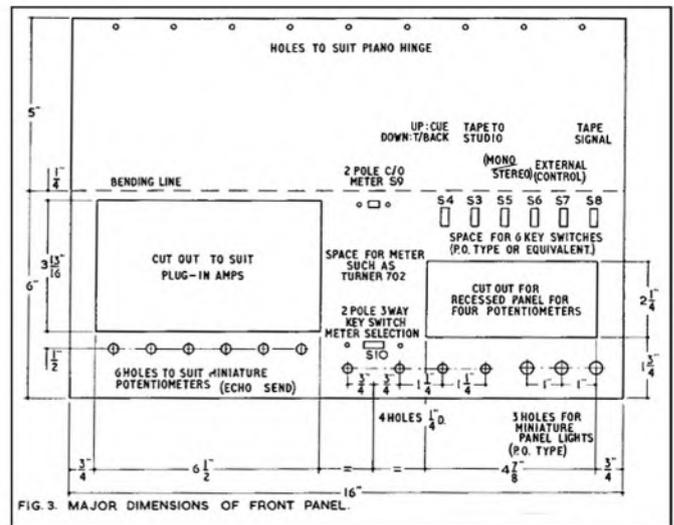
MAJOR DIMENSIONS OF FRONT PANEL.
